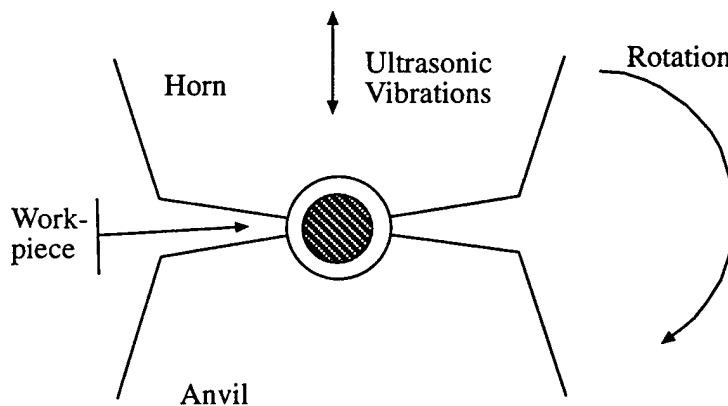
Schematic of ultrasonic welding fixture.
